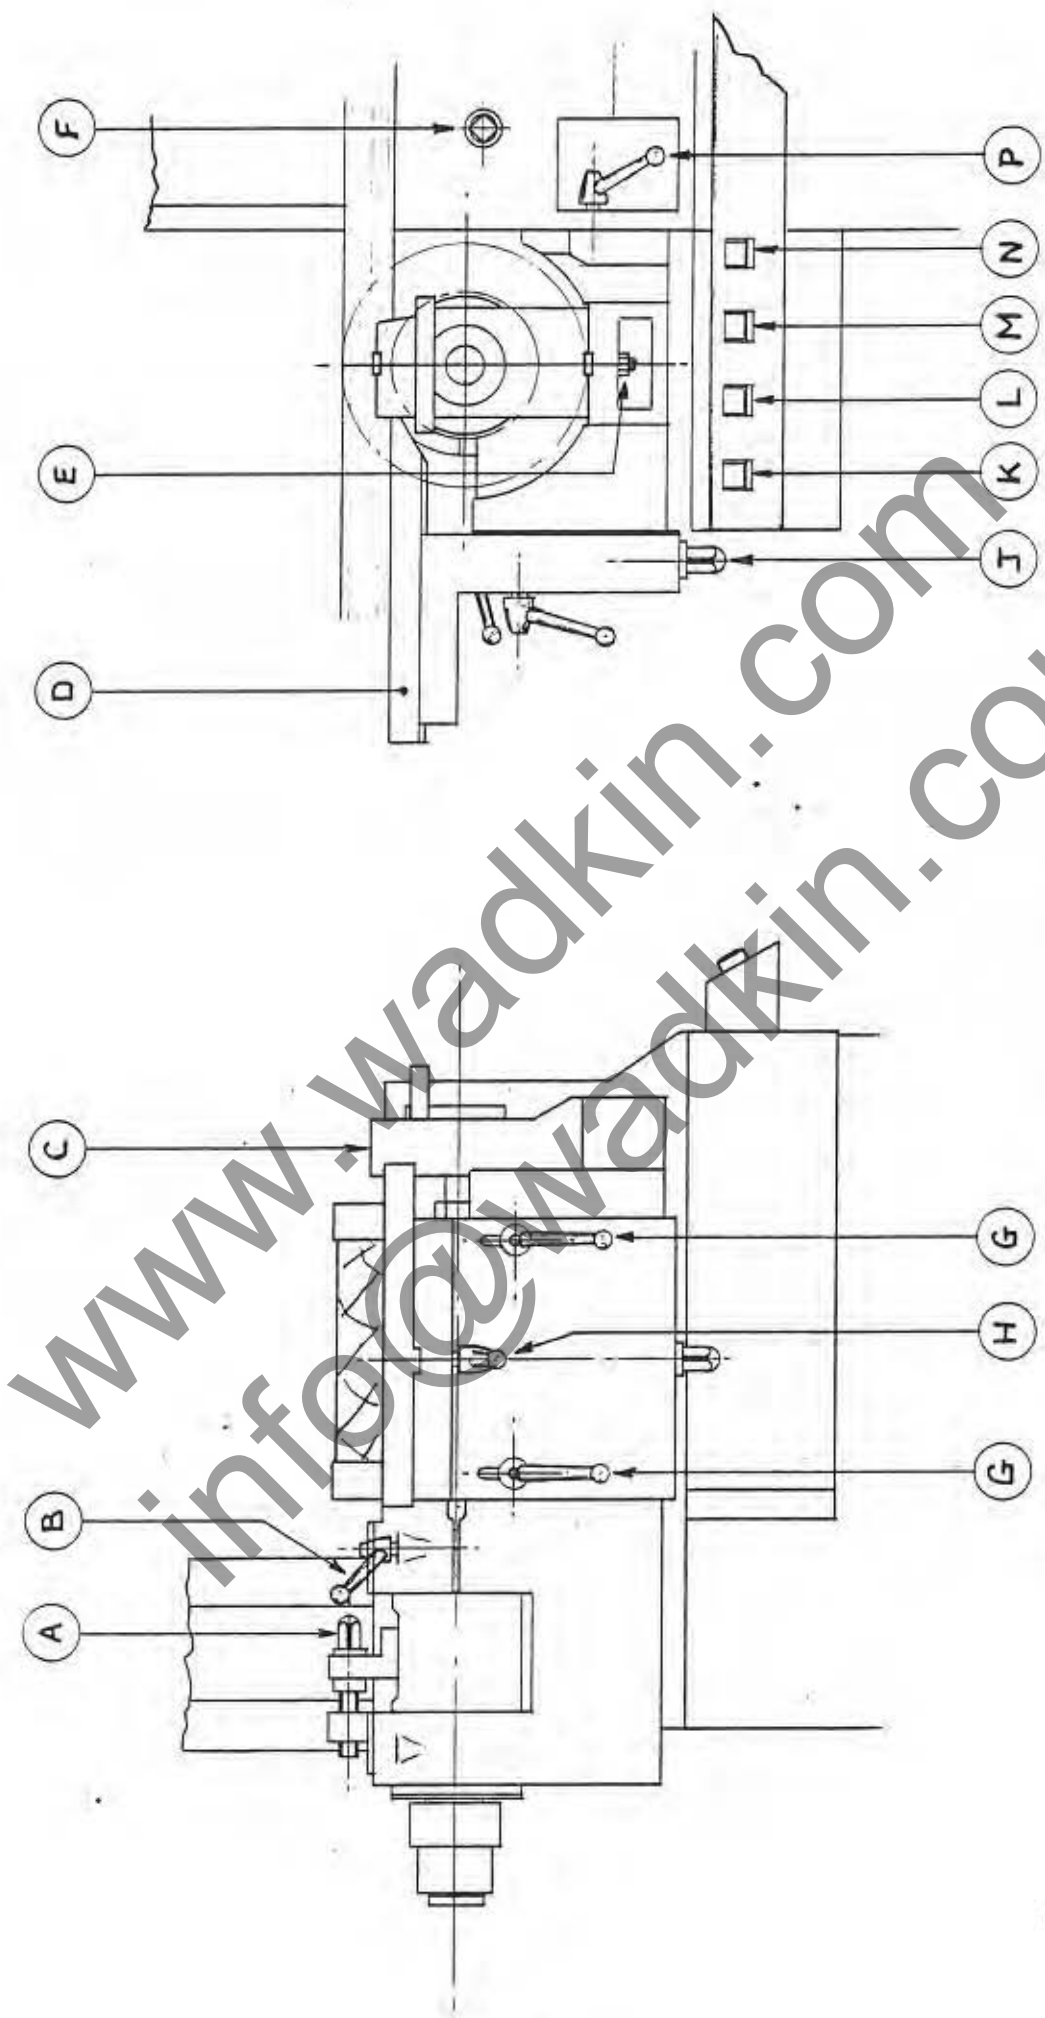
SECOND BOTTOM HEAD AND OUTFEED TABLE
